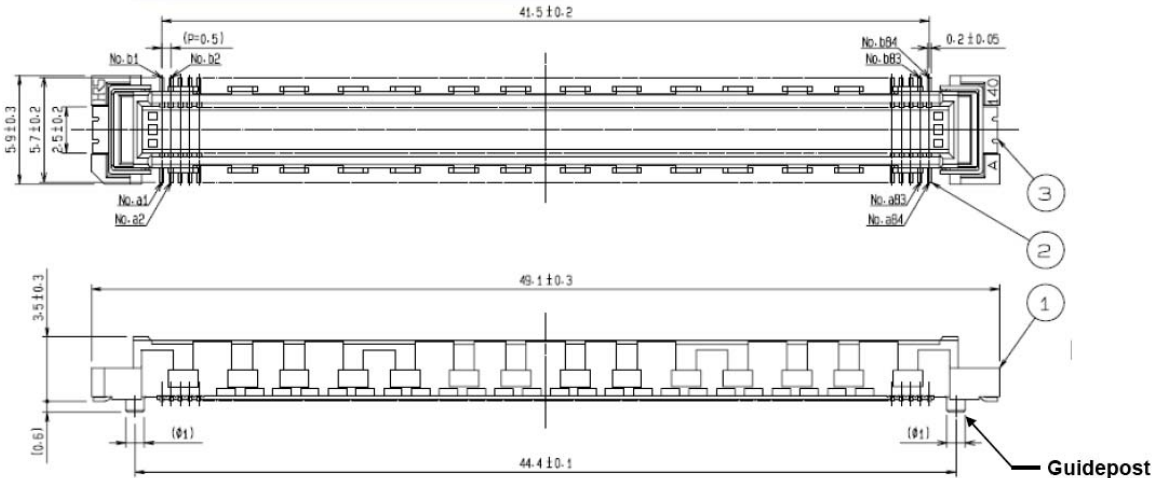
Hirose FX10A-168P-SV(83) Header Connector Assembly
